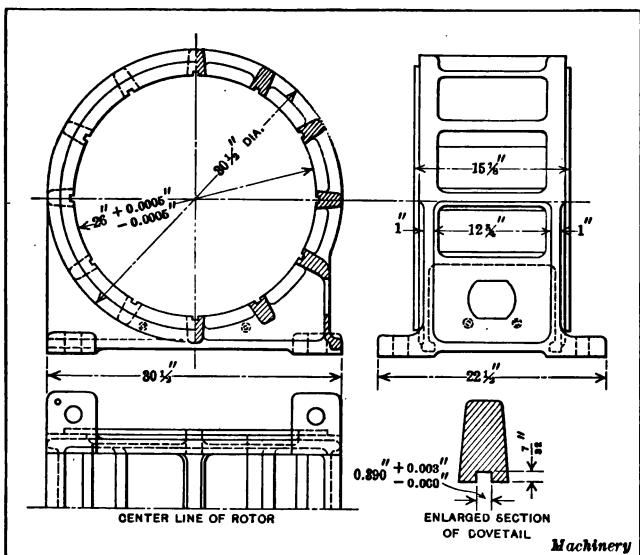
Stator Casting in which Twelve Grooves are broached on a Machine Similar to the one shown in Operation in Fig. 8
